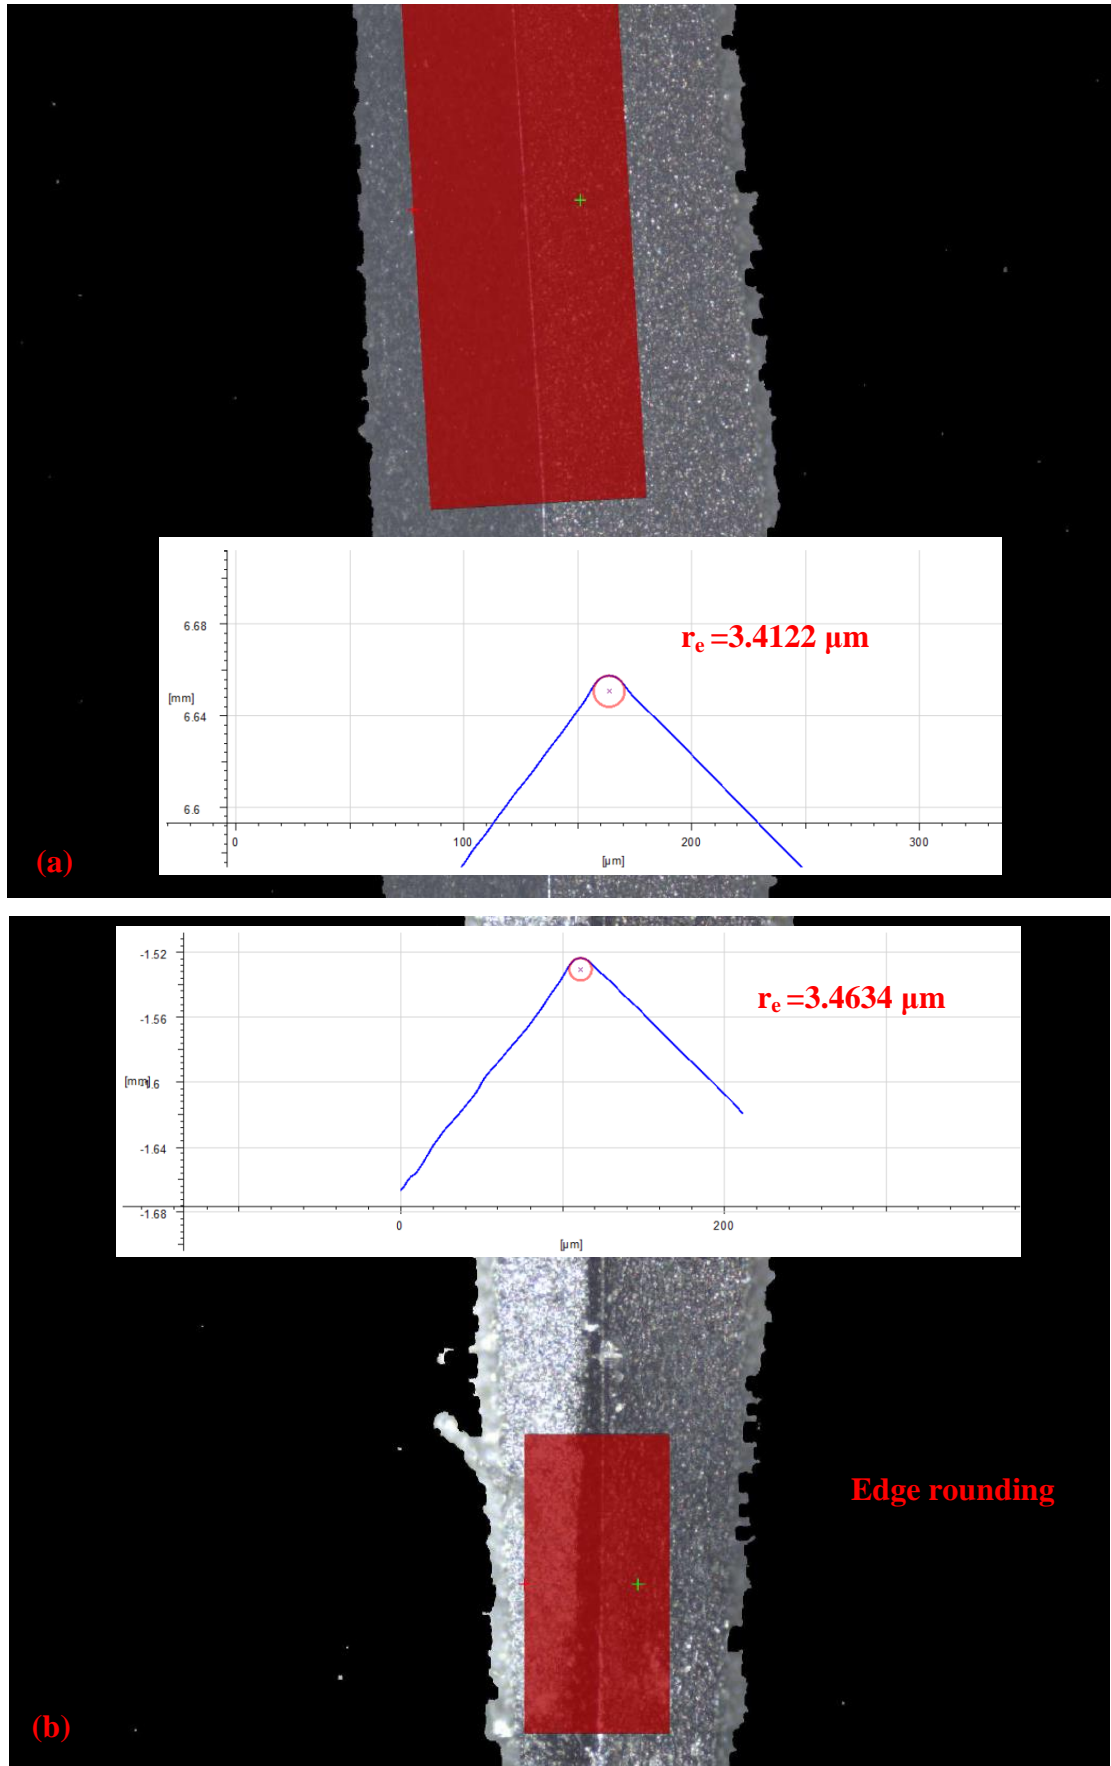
Edge radius of PCD tool (a) New tool (b) Used tool
